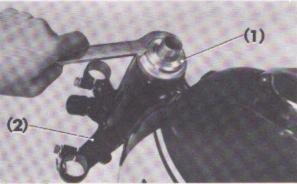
(1) Steering head top thread (2) Steering stem
